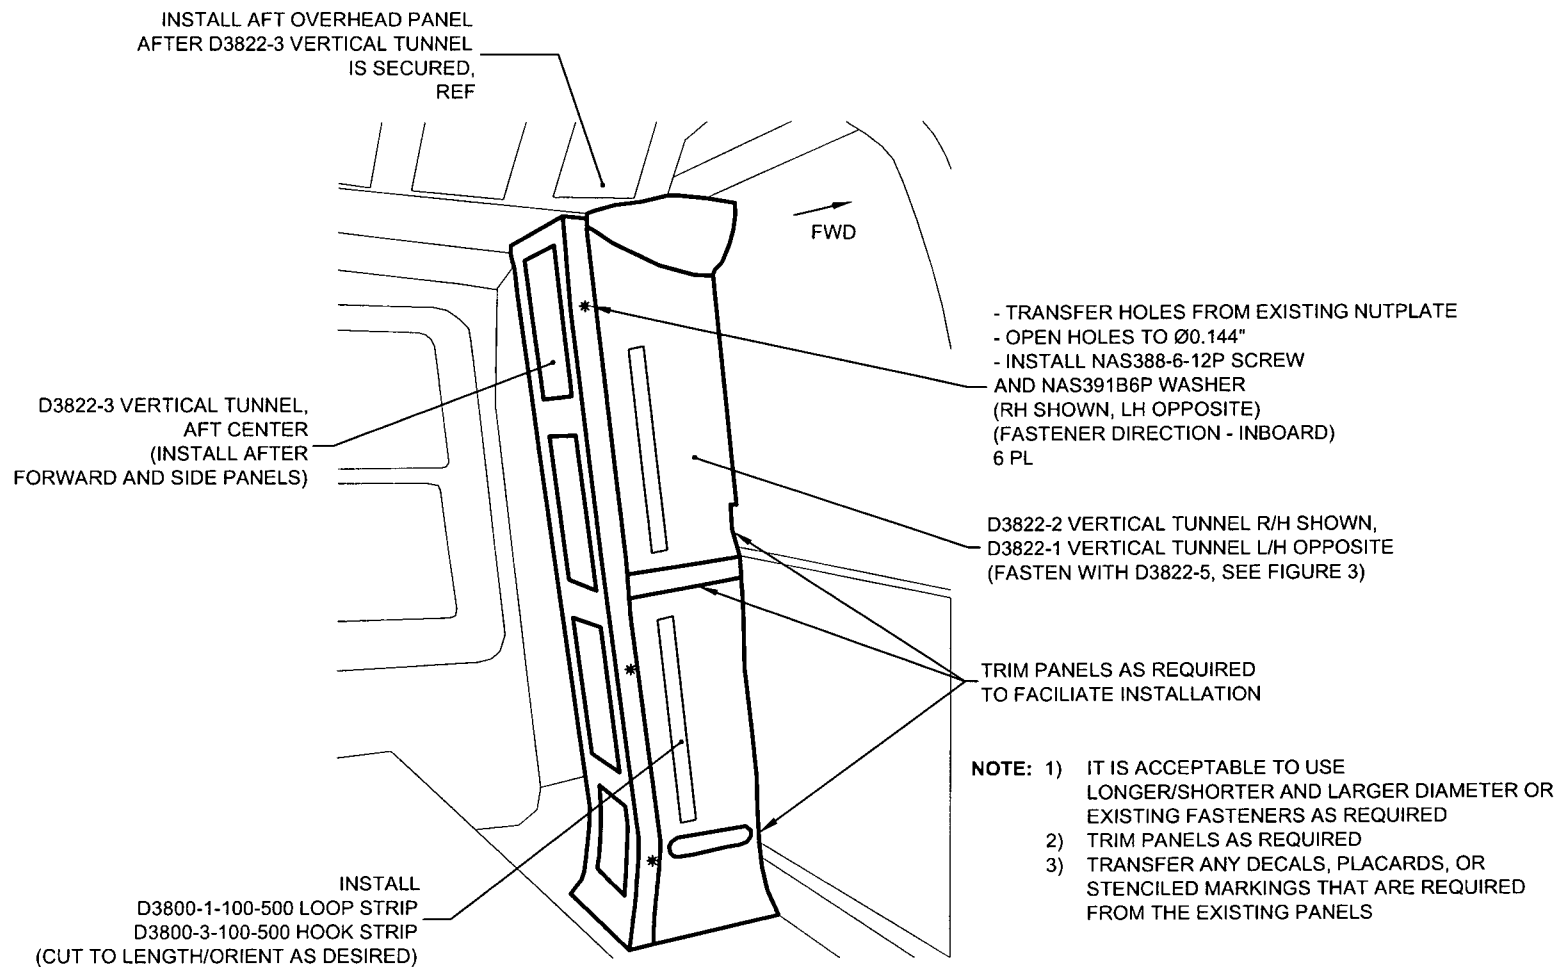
D3822-1/-2/-3 VERTICAL TUNNEL PANEL INSTALLATION
